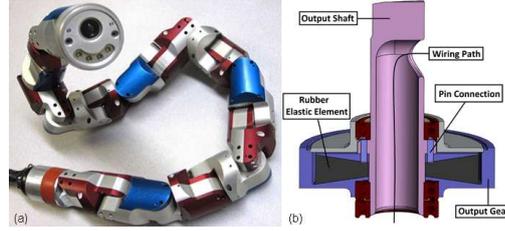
(a): Unified Snake Robot [5]. (b) Cross-section of SEE [2]. Note the tapered shape of the rubber element. Bottom and top of rubber element fixed to gear output and output shaft respectively.
